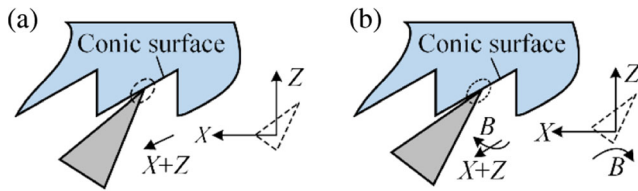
Conventional CNC machining methods: a tool tip engaged in the cutting and b constant cutting edge angle in cutting process
